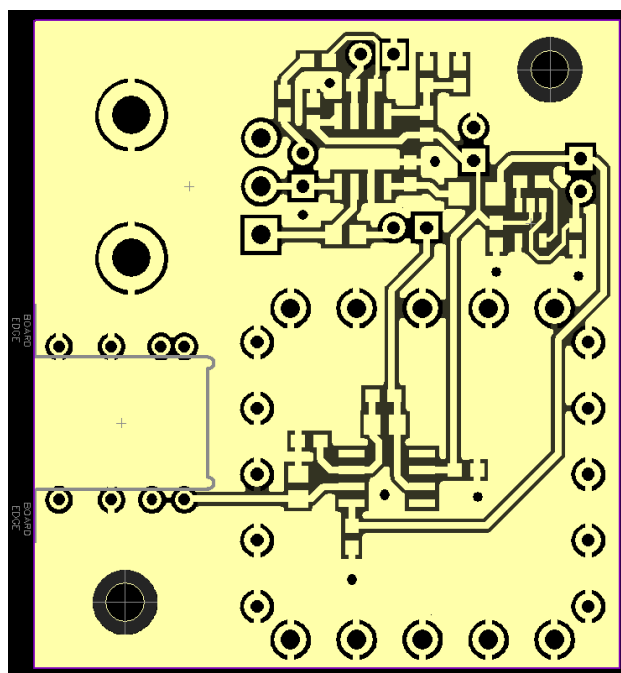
Layout of the prototype PCB for the condition monitoring block.
